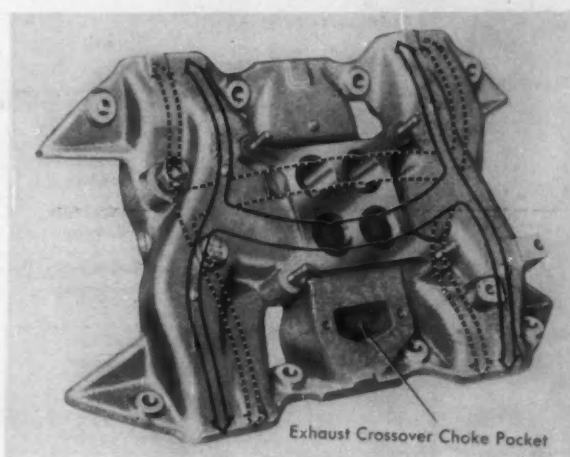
Intake Manifold (4-Barrel Carburetor).
